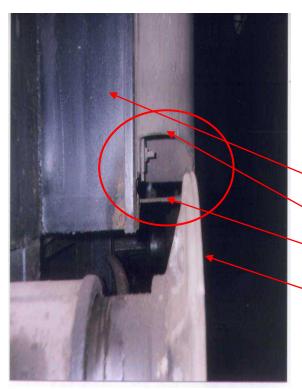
Rubber flange clear of buffer and foot plate as per drg. no. RDSO SKECH - 99056.
